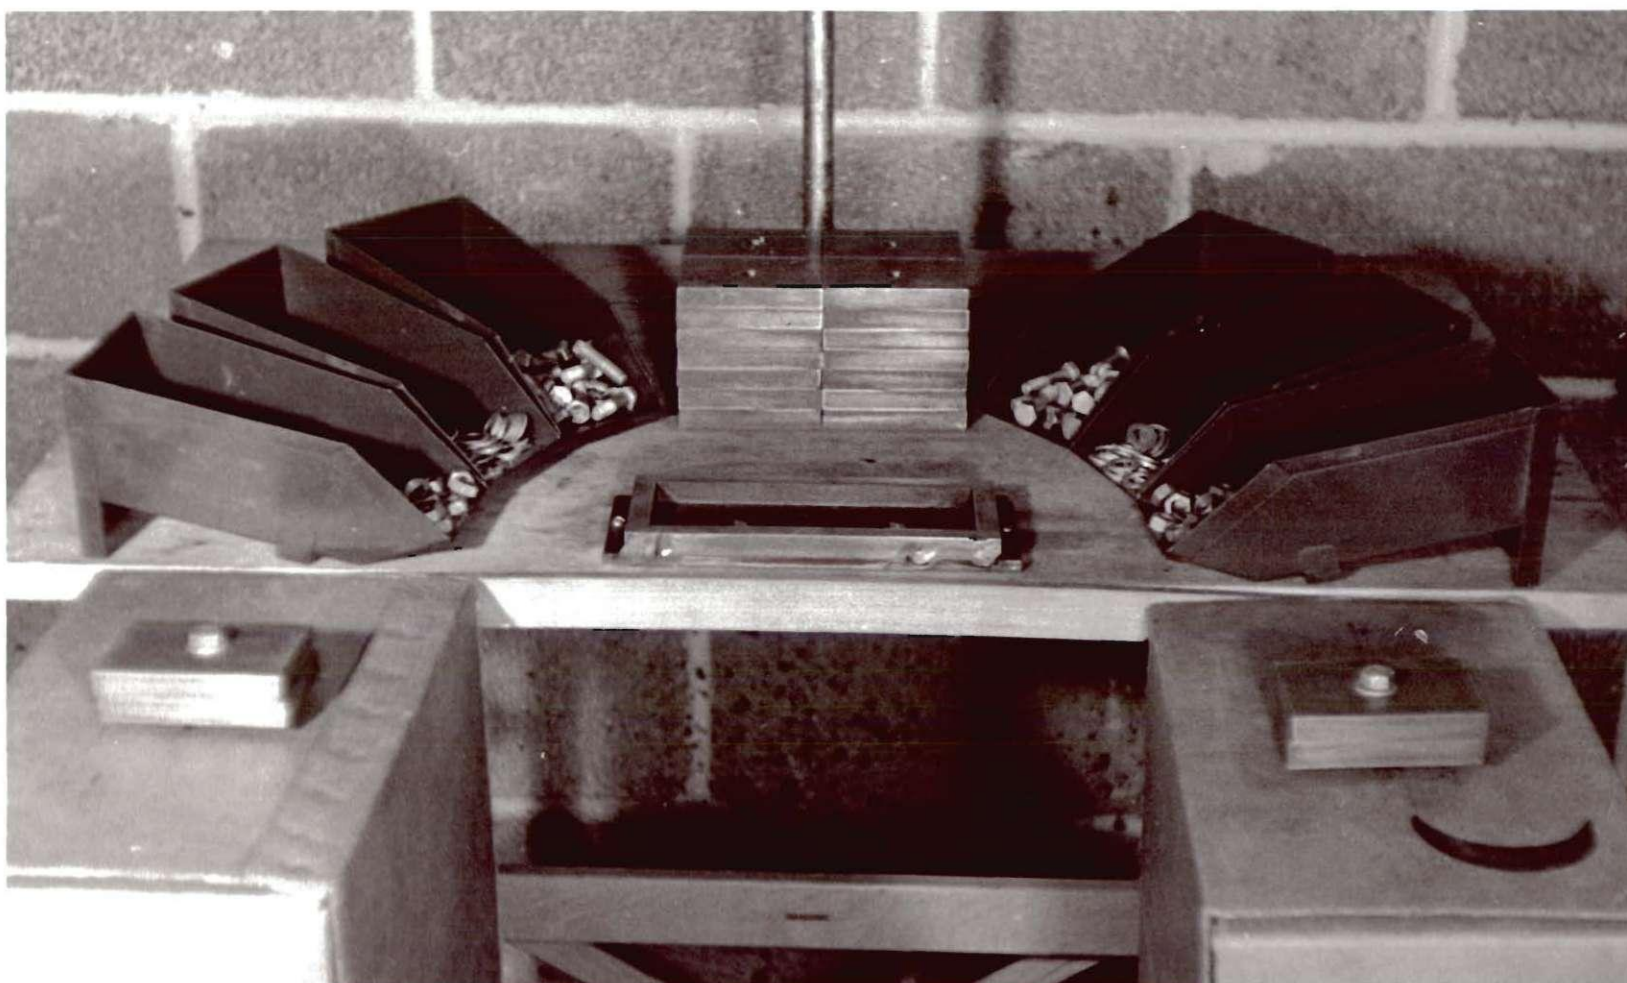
CLOSE UP WITH ASSEMBLED PLATES ON TOTE BOX
